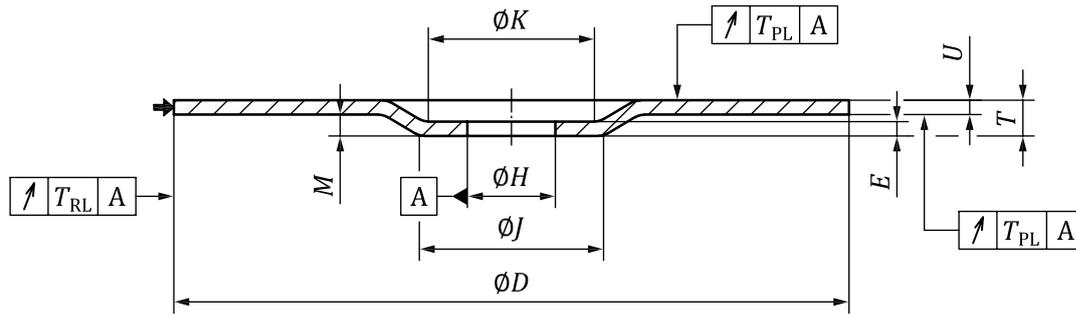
Depressed centre cutting-off wheel (Type 42)
